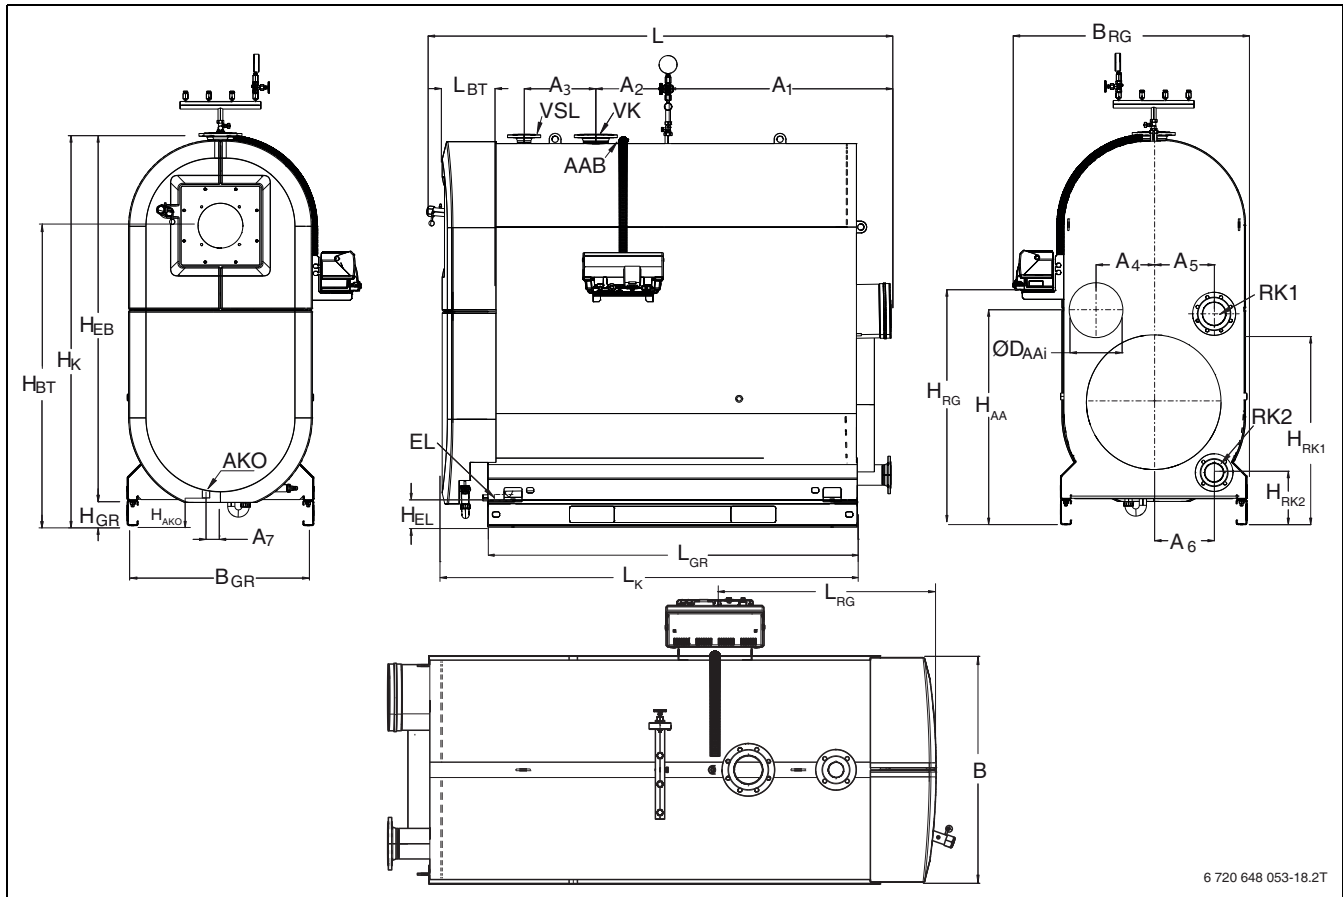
Boiler dimensions 800 kW, 1000 kW, 1200 kW
